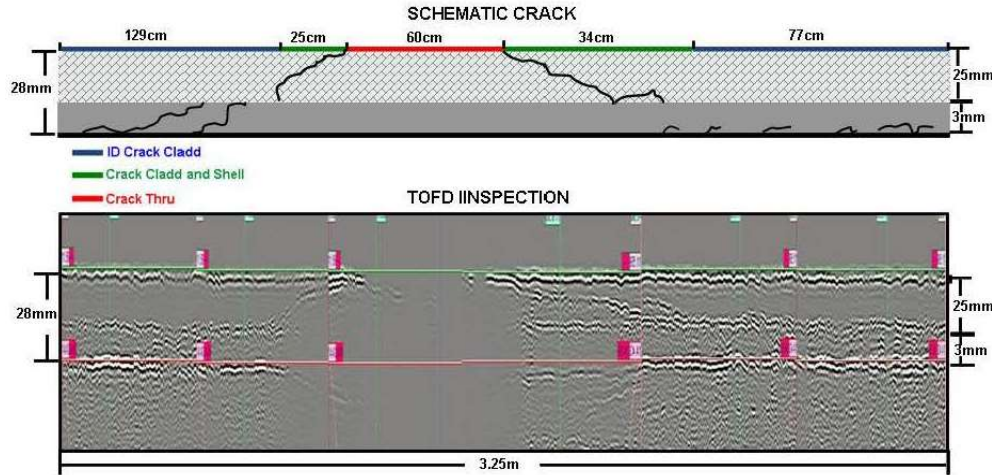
Typical Output for TOFD Inspection of Crack Initiating in the Cladding on the Inside Surface and Propagating Through-wall
